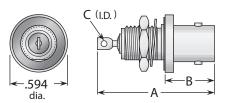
(Front mount, hermetically sealed, with mounting gasket)
